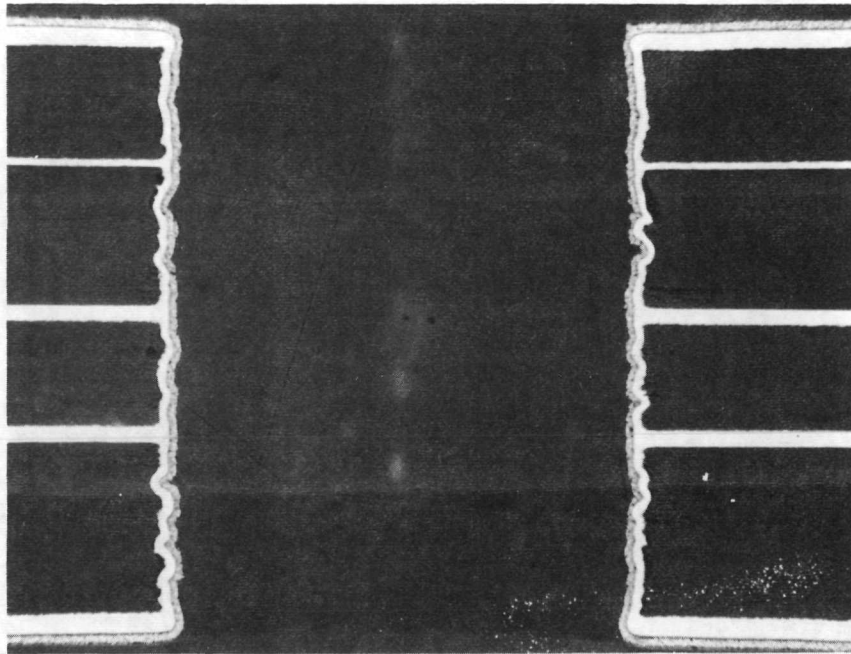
Photomicrograph (36X) of a Cross Section of a Plated-Through Hole from a Standard Test Board Used to Obtain the Data in Figure 33.
